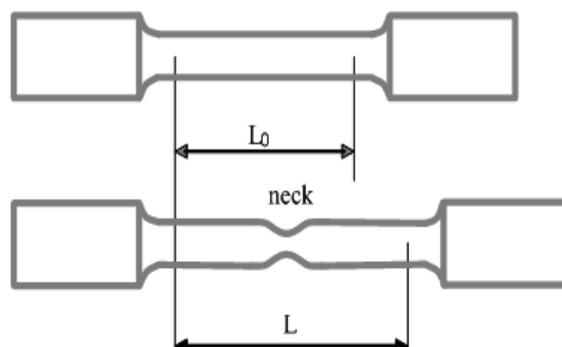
Recycle Aluminium Specimen for Tensile test
